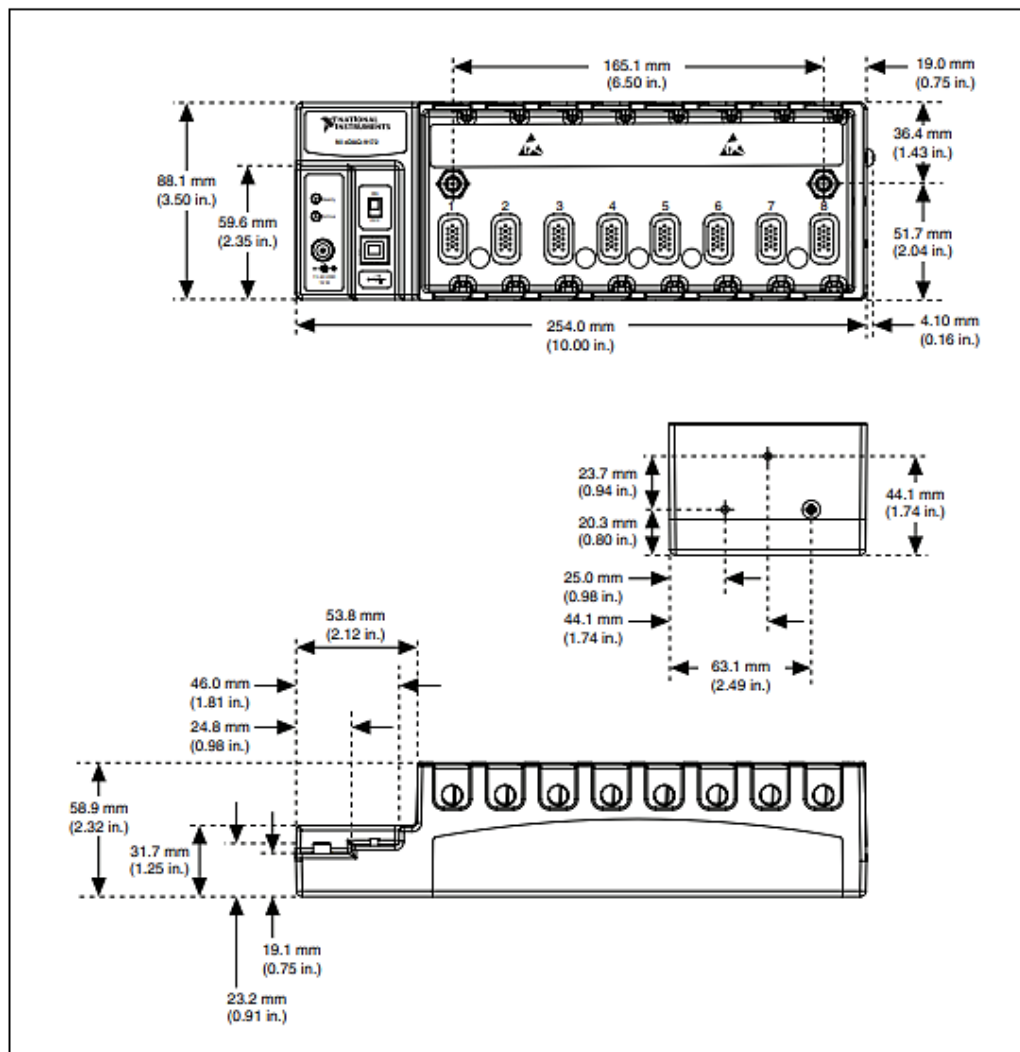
NI cDAQ-9172 with Dimensions in Millimeters (Inches)
